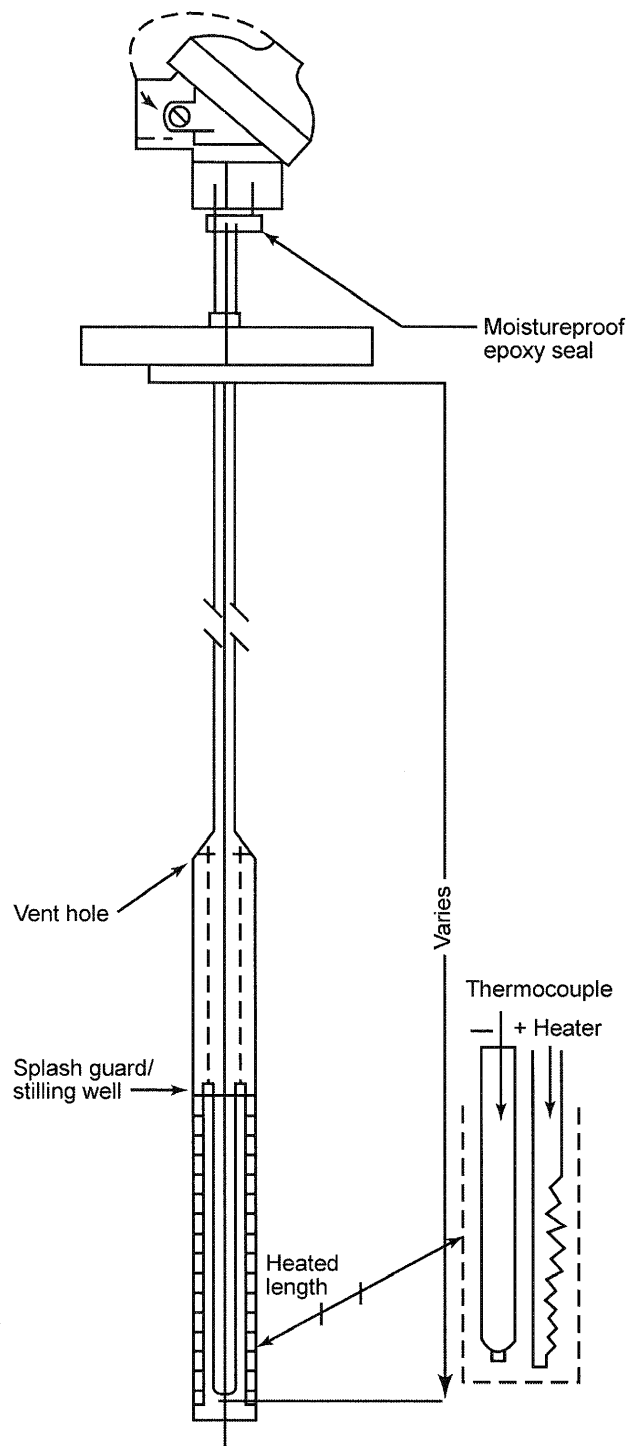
Example for a Heated Thermocouple Assembly—High-level Probe
